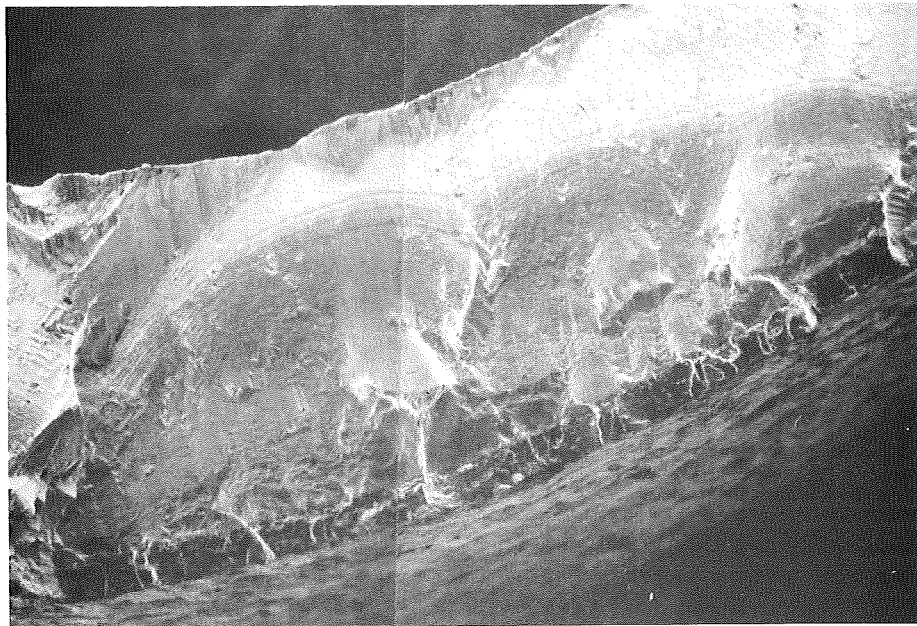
PWA 273 Coated PWA 1480 <100>; Specimen JB-22; After Being Thermo-Mechanically Fatigue Tested at 427°C - 982°C (800°F - 1900°F)  $\Delta\epsilon_t = \pm 0.275$  Percent, 1 CPM, Out-of-Phase for 3772 Cycles
